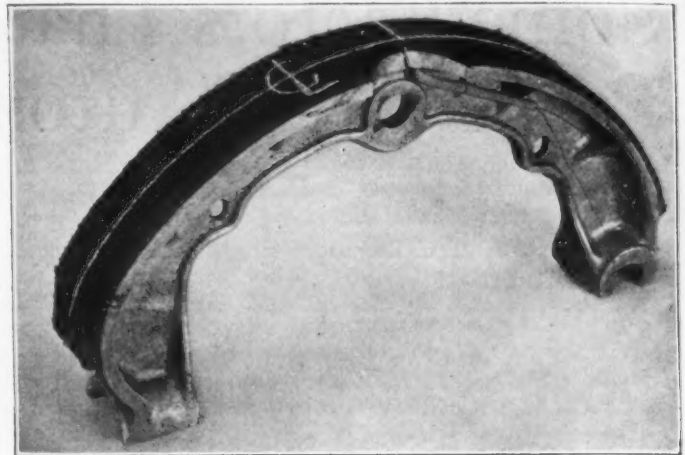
PHOTOGRAPH OF CUTAWAY BRAKE-SHOE ASSEMBLY
